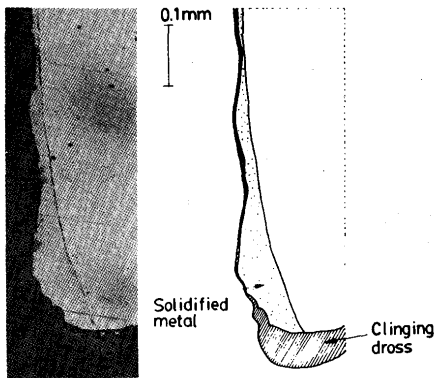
Appearances of molten metal and clinging dross near bottom edge. (speed: 3 m/min, thickness: 2 mm)
